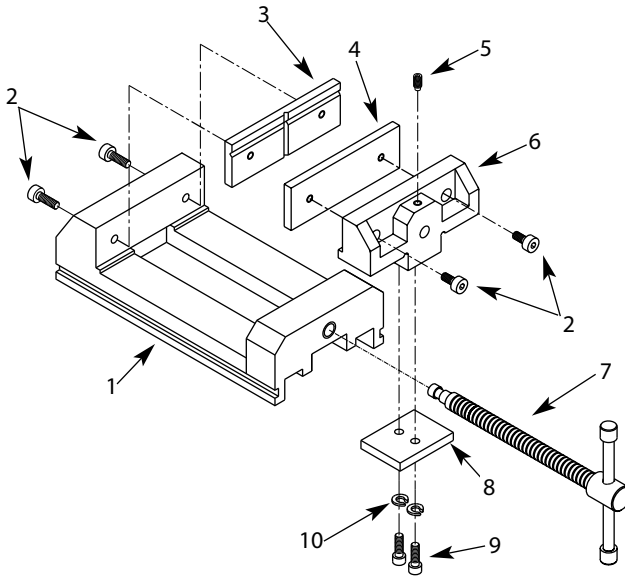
Replacement Parts Illustration for 4" and 6" Drill Press Vises
